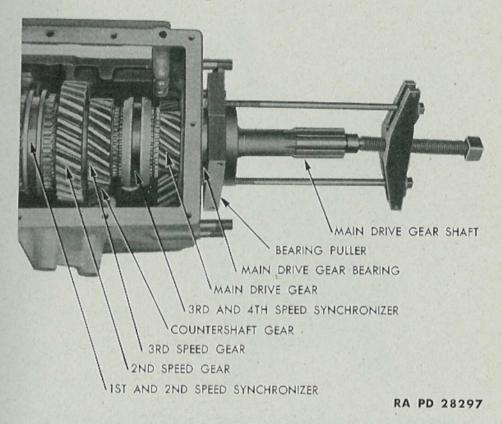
Pulling Main Drive Gear Ball Bearing with Puller 41-P-2900-25
